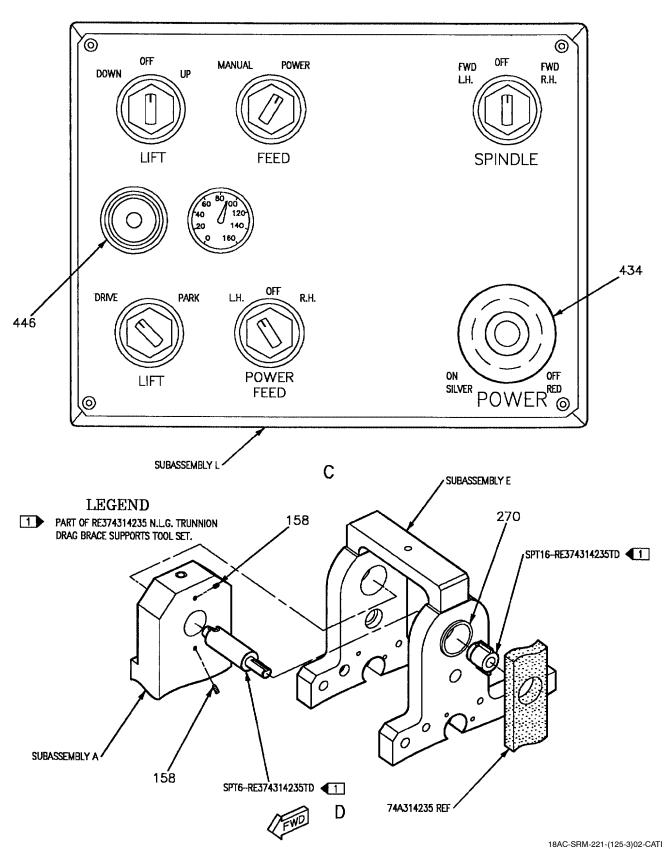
Trunnion Bearing Third Oversize Sleeve Installation (Sheet 3)
